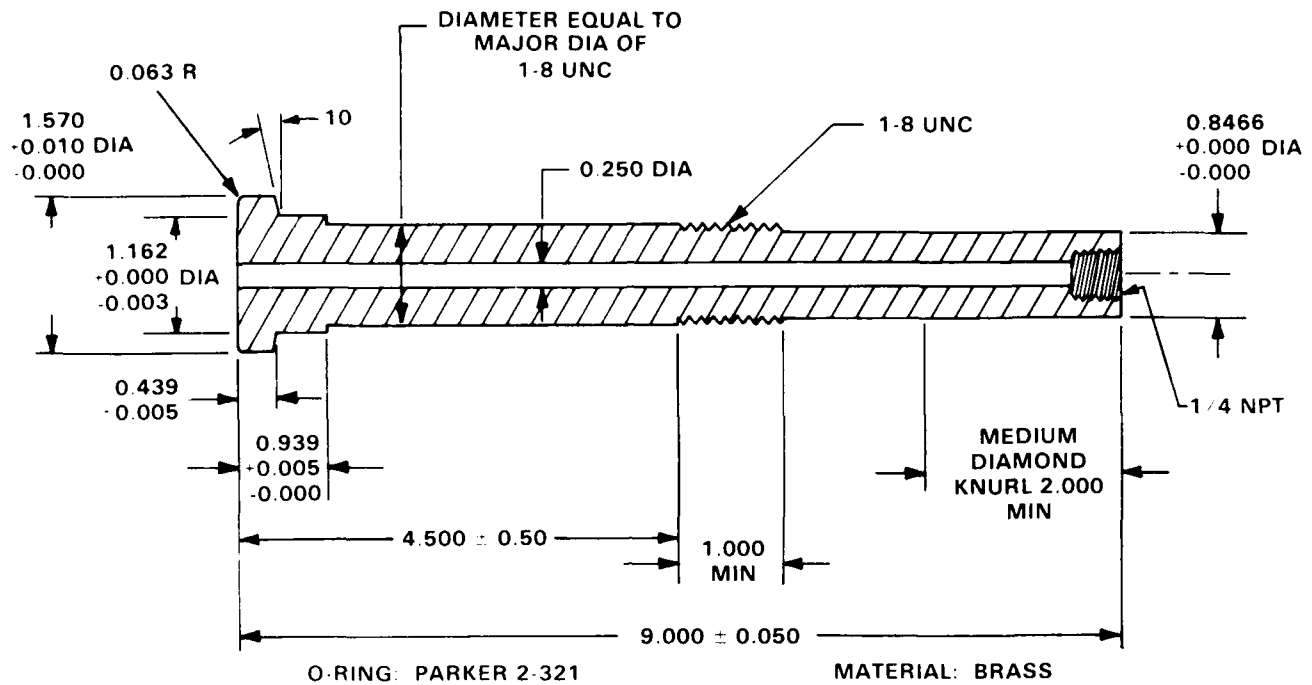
SCHEMATIC OF INNER PART OF ULLAGE INSPECTION FIXTURE.
